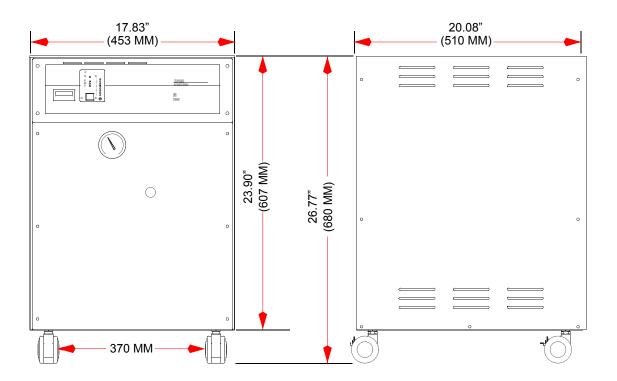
8600 Compressor Side and Front Dimentions, Type 02
